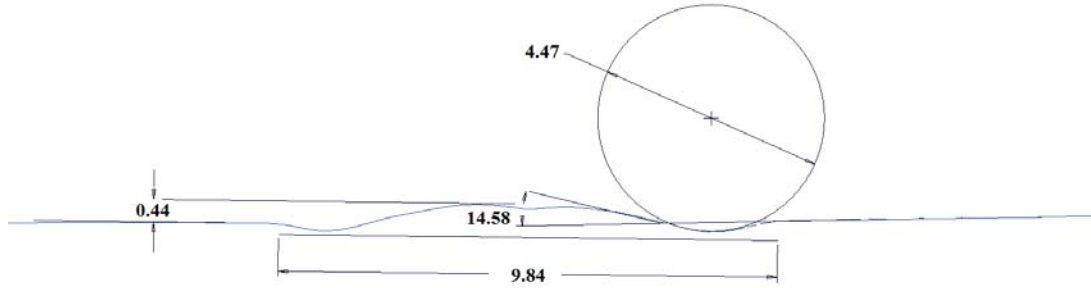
Schematic illustration of the weld profile and weld parameter measurements for the laser-hybrid welded joint
